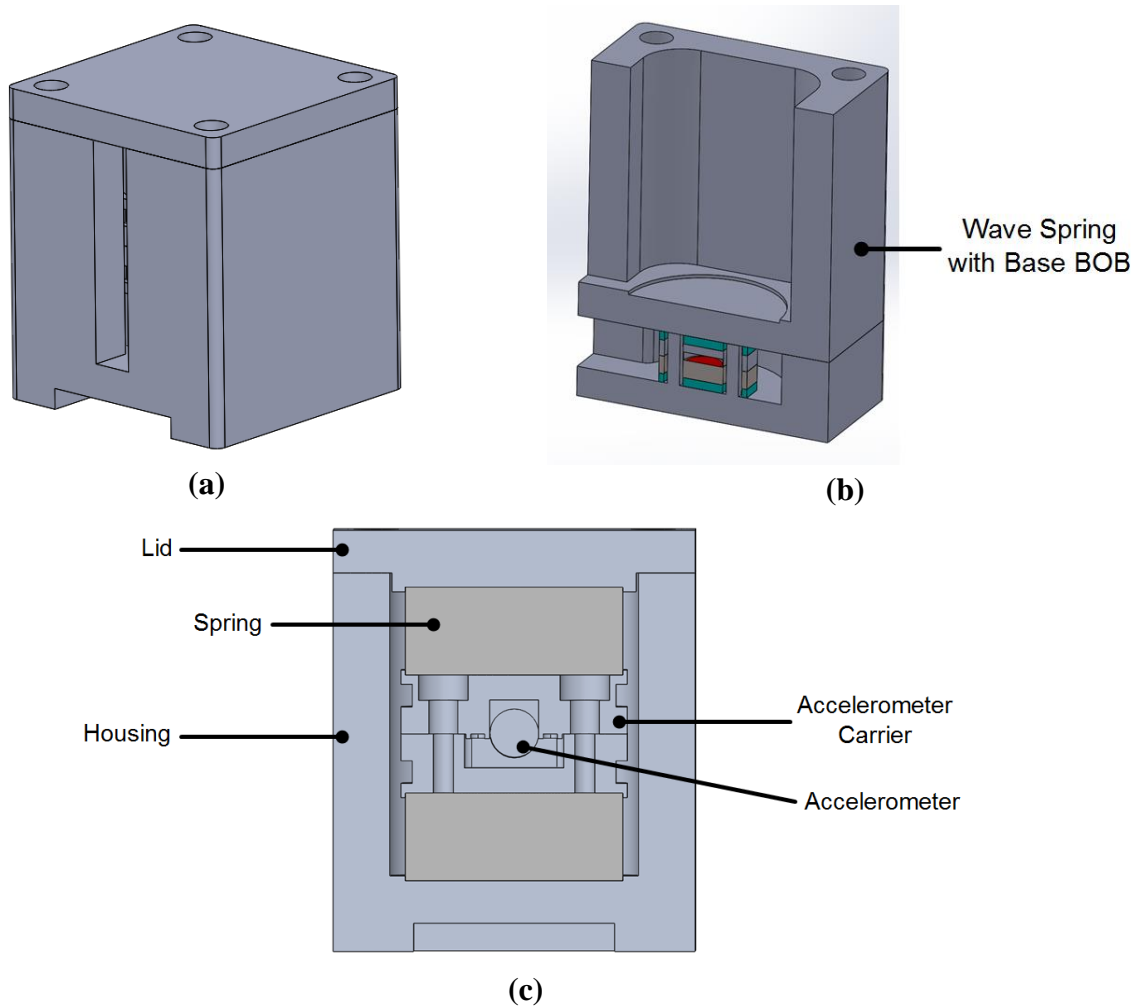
Isometric (a), Section (b), and Labelled Section (c) Views of Wave Spring with Base BOB
